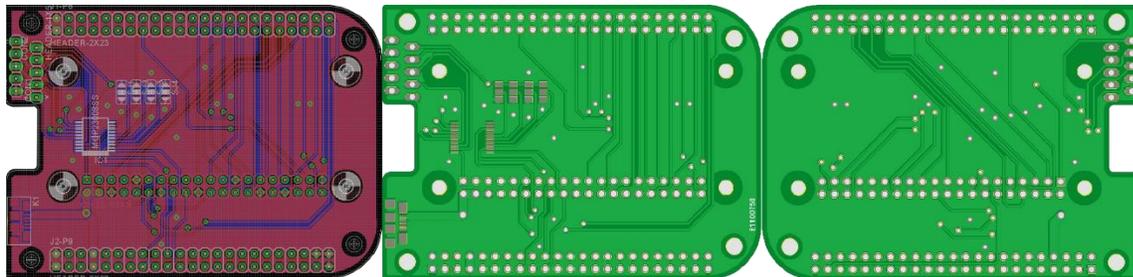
PCB design, top and bottom view of the pin transformation PCB Board.
